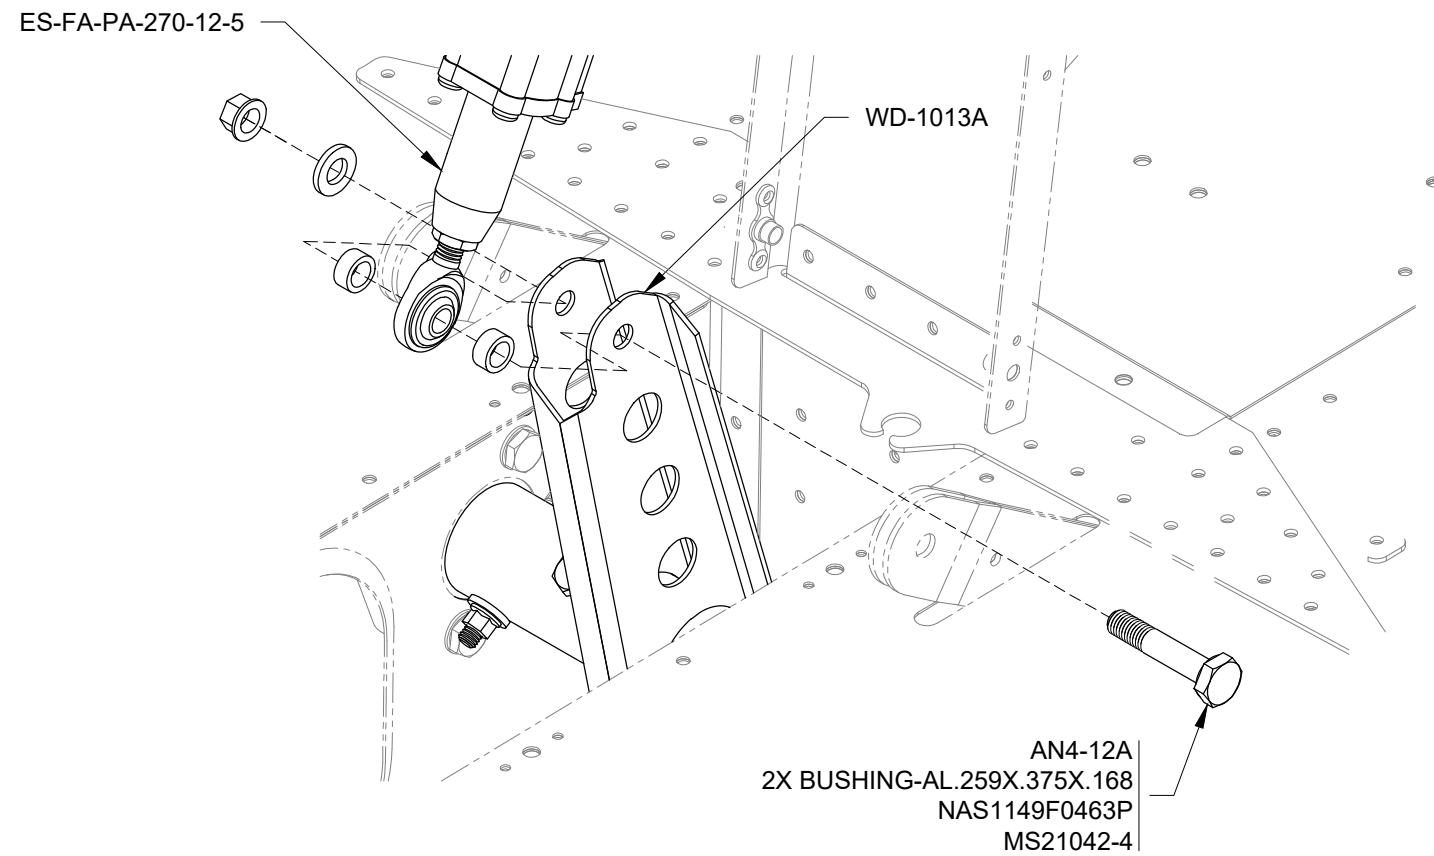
LOWER FLAP MOTOR ATTACHMENT
